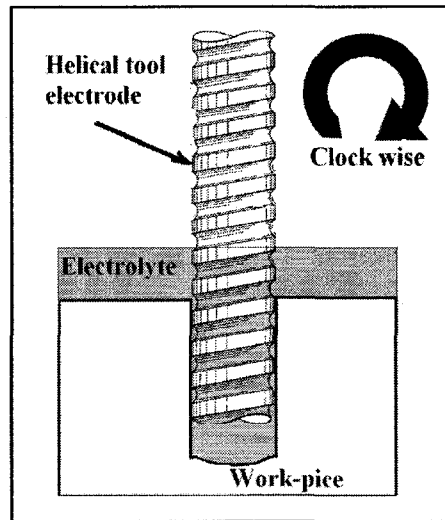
Helical tool electrode, to feed electrolyte into the machining zone to improve the chemical etching and to evacuate the melted material.
